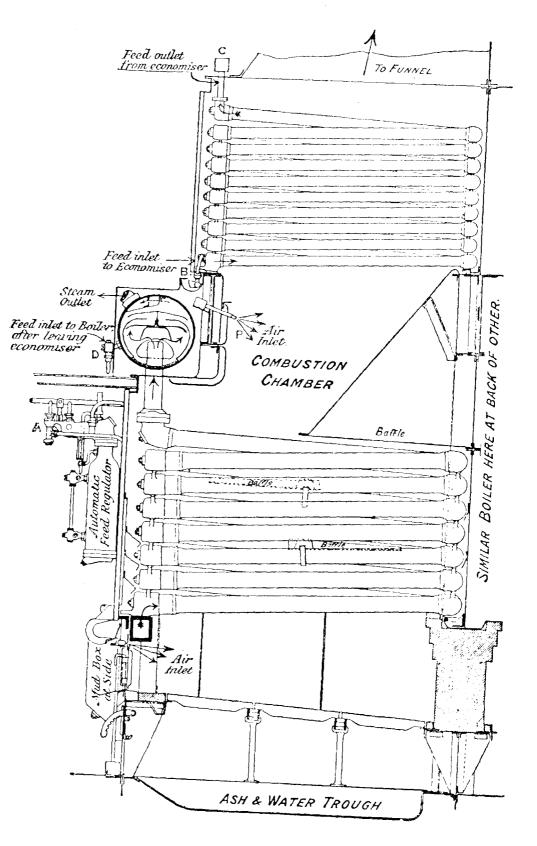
B—A SECTION THROUGH A BELLEVILLE BOILER.
